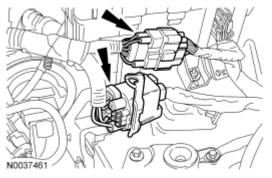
Locating Engine Wiring Harness Electrical Connectors Courtesy of FORD MOTOR CO.
